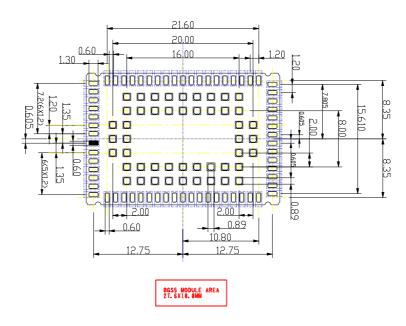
Dimensions of BGS5 (all dimensions in mm)
